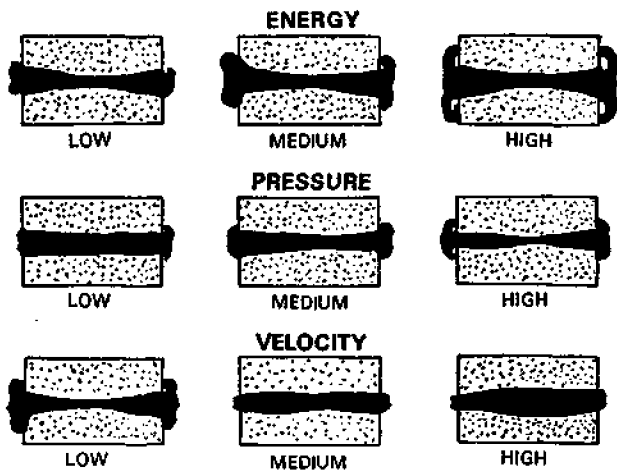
Effect of change in weld parameters on HAZ and flash pattern for Inertia welding of steel bars.
